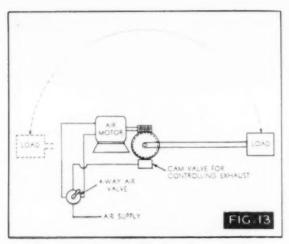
shows an arrangment for a motor to roll over a load. The air motor is geared directly to the rotating arm. In Fig. 14 (below) the cylinder is single-acting, working only on the pull stroke.
